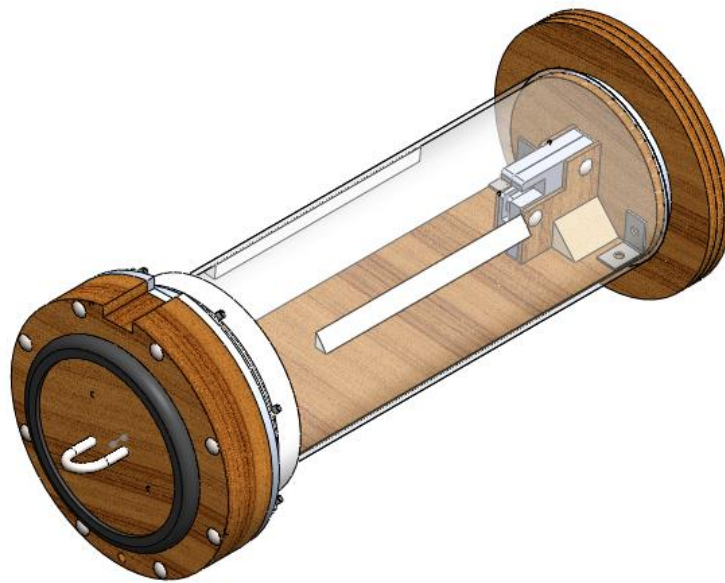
Isometric View of Assembled Payload Bay without Rover
